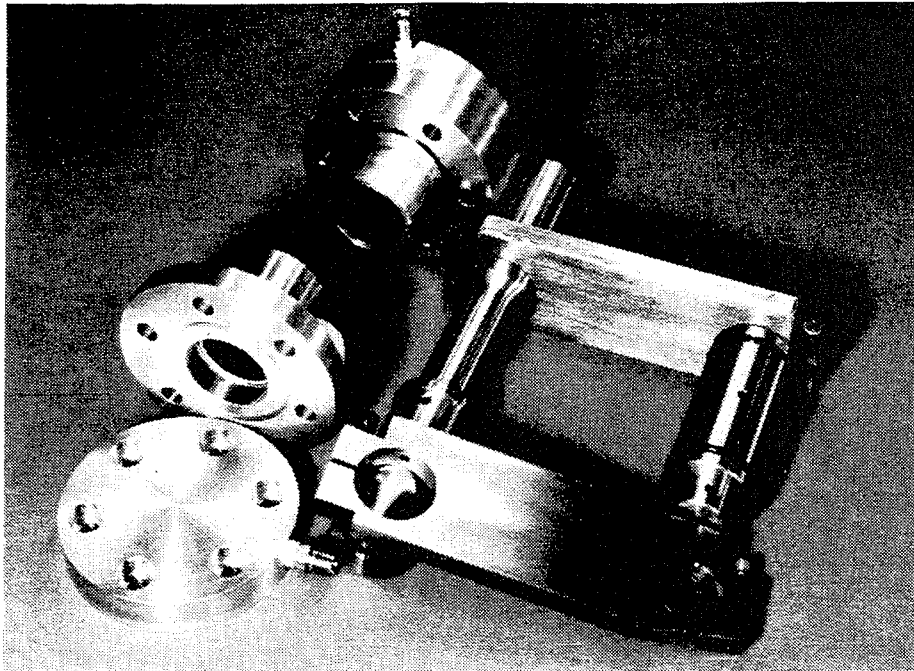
SWINGLINKS, PIVOT SHAFT AND JOURNAL BEARINGS, AND YOKE SHAFT
